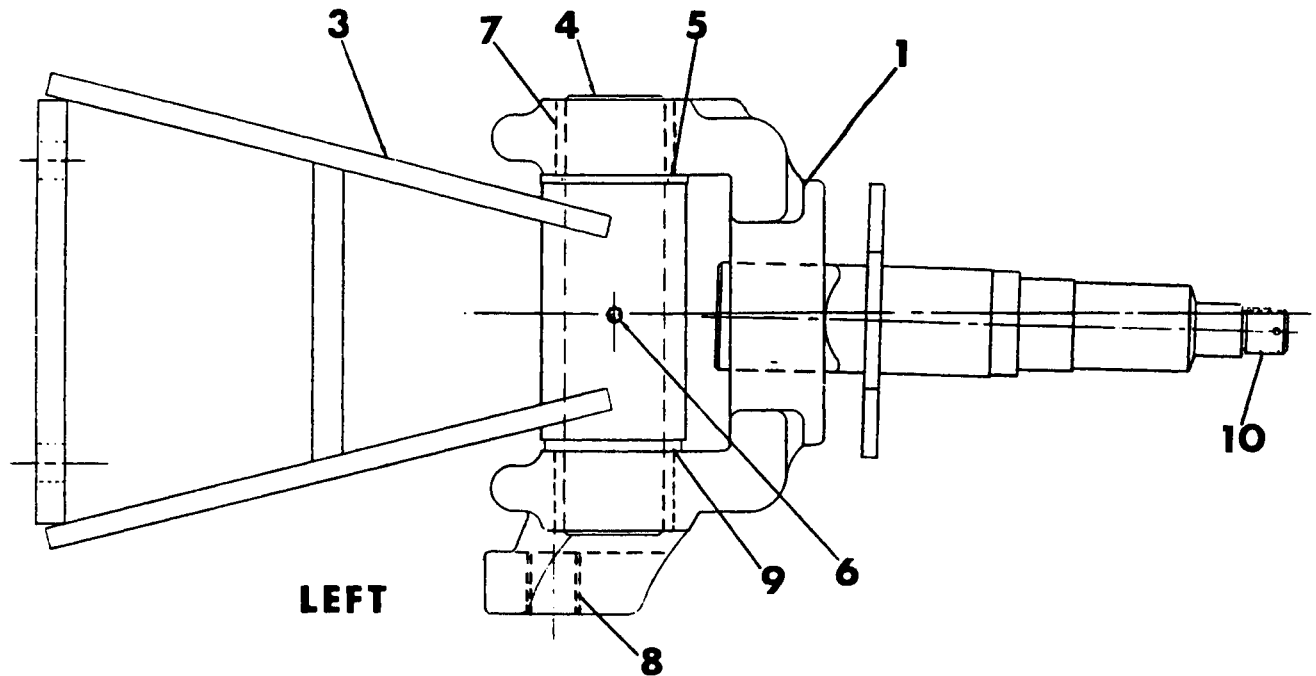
A - FRONT AXLE ASSEMBLY (RT26E) (RT26G)
